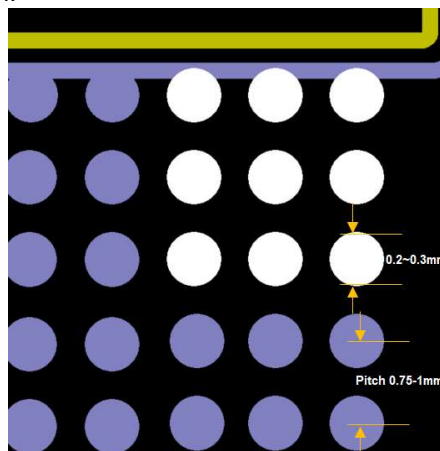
PCB Exposed Pad Land Pattern Via Grid
